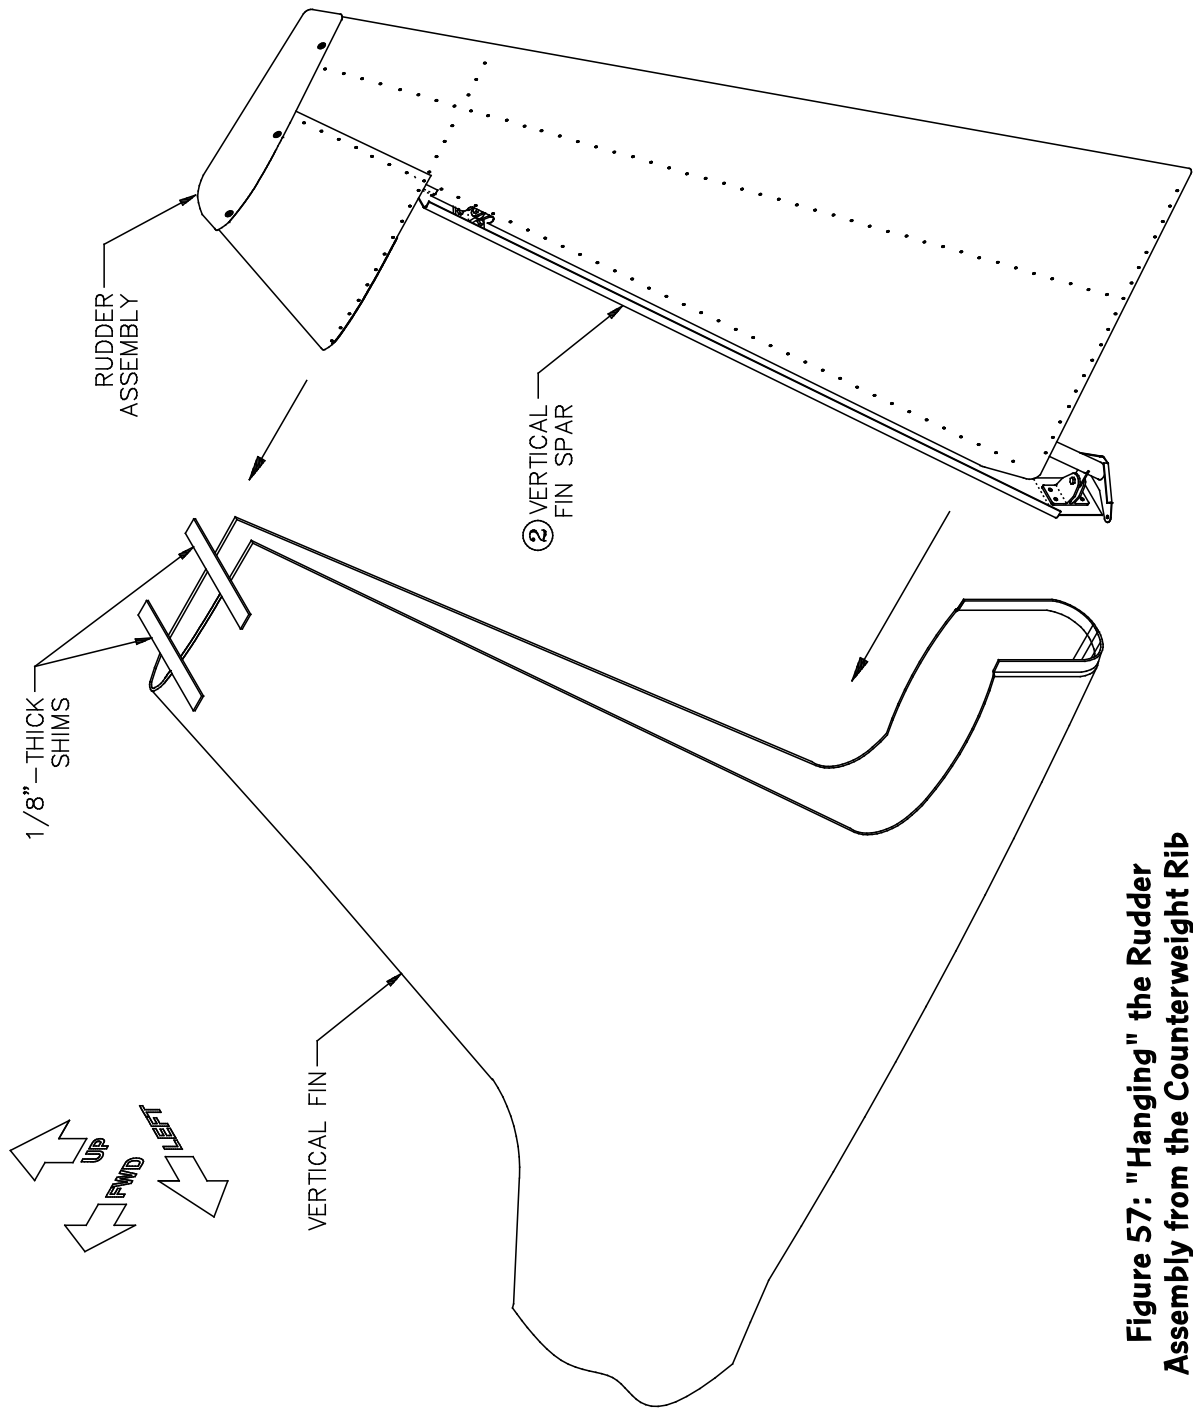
"Hanging" the Rudder Assembly from the Counterweight Rib
